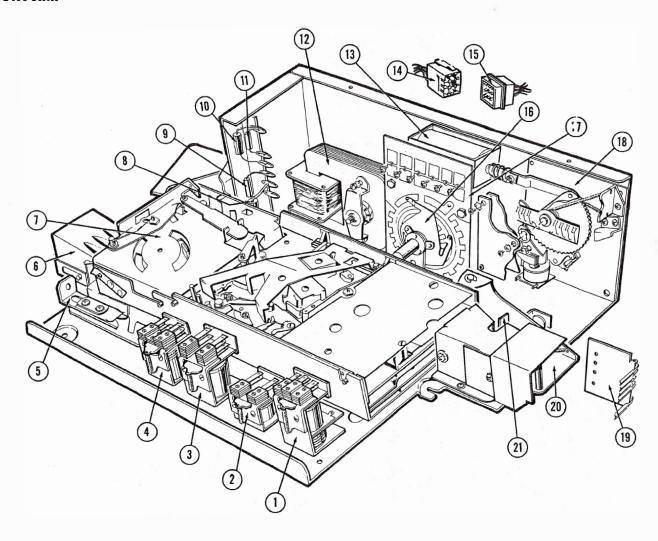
COIN REGISTER MECHANISM, DUAL PRICING
